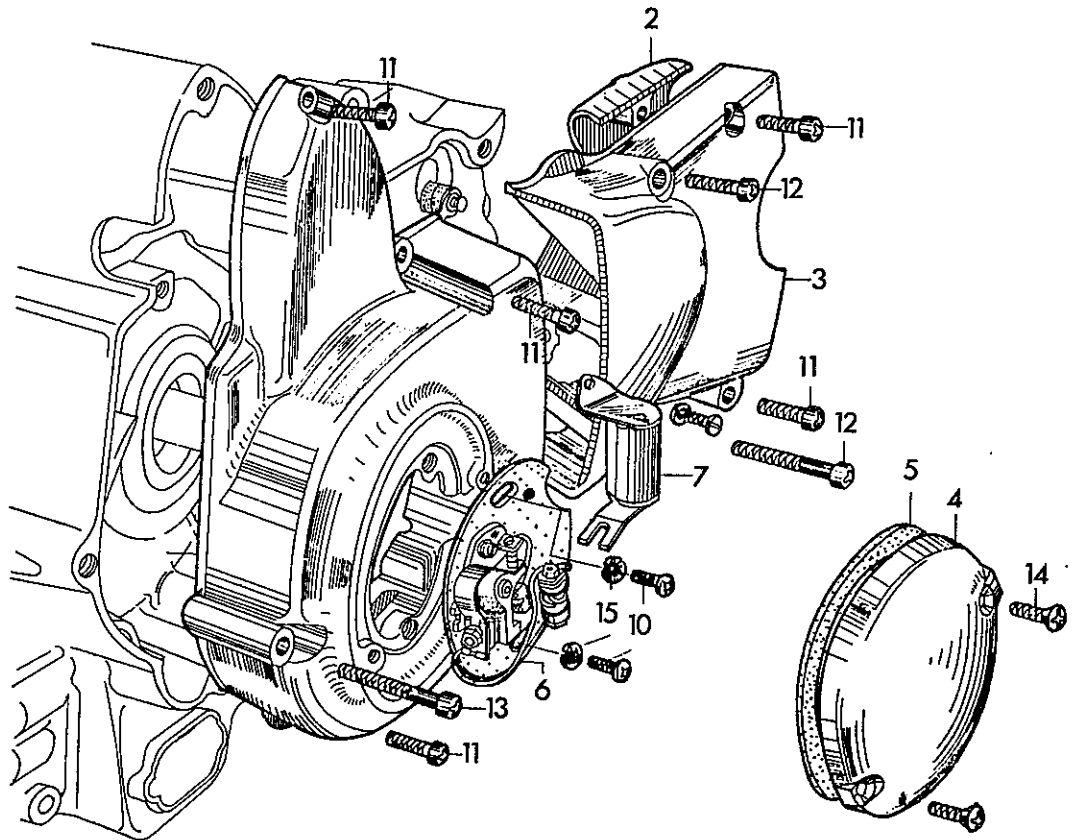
Contact breaker in left hand crankcase cover - C102
